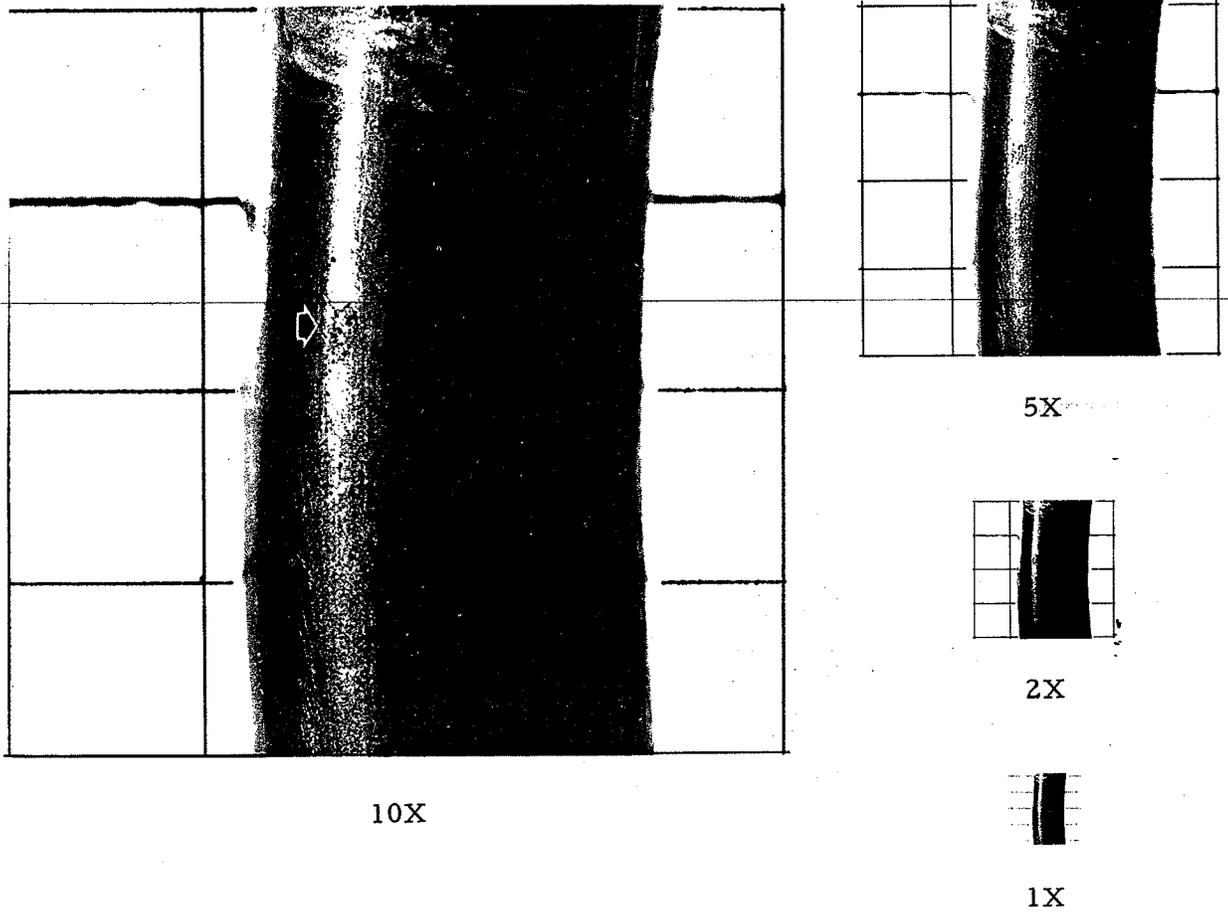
Mold deposit defect, minor, W = 0.210 inch.
